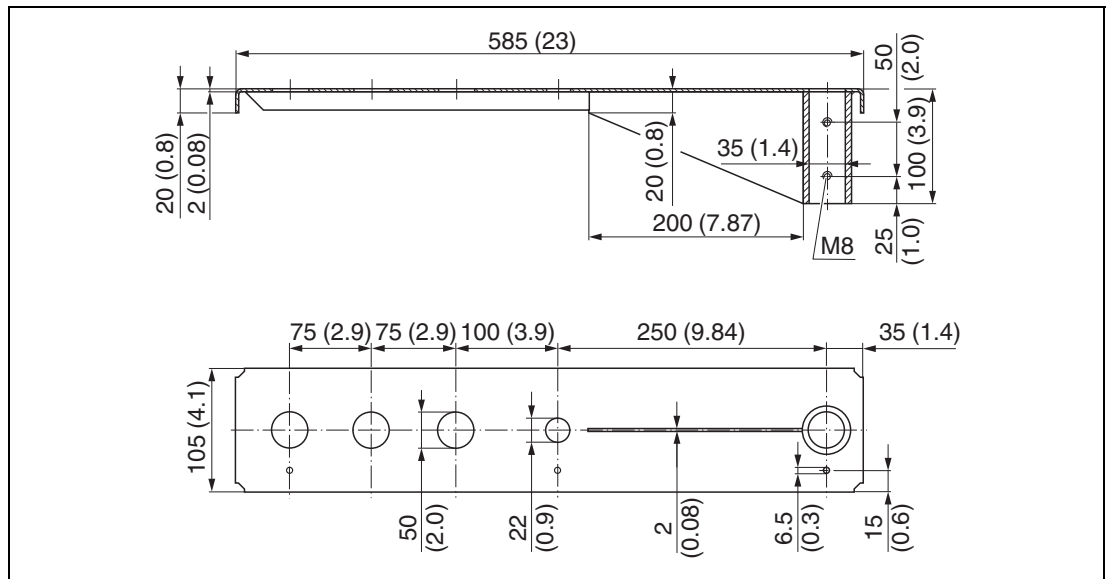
Dimensions of cantilever (short) with pivot for G1-1/2 sensor process connection on front, engineering unit: mm (inch)
